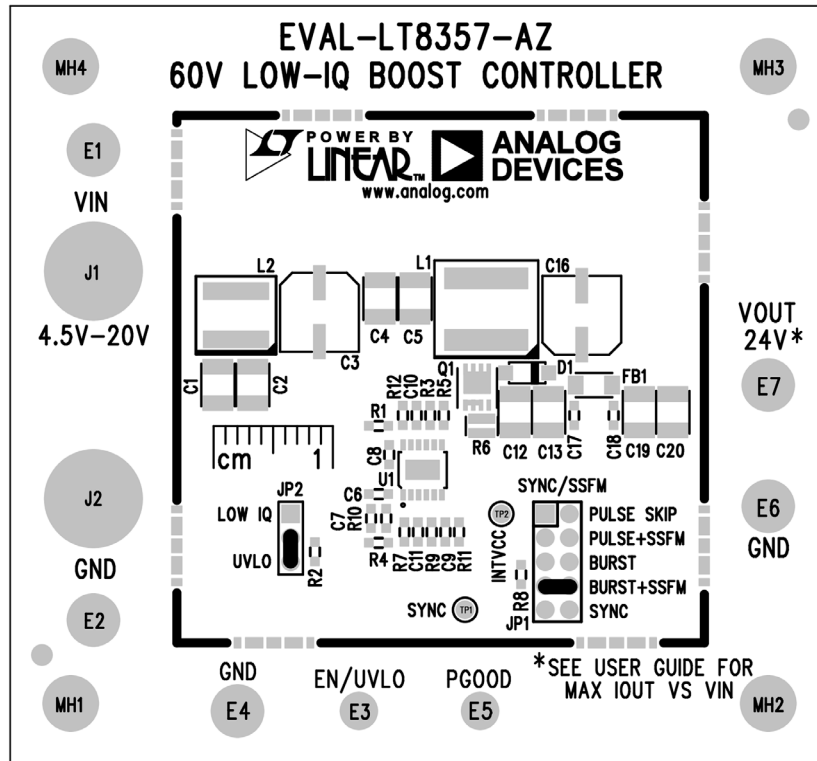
EMI Shield Clips Can Be Soldered to the Eight Placeholders on the PCB. A Square 44mm × 44mm Outline Shows Where the EMI Shield Fits onto the PCB
